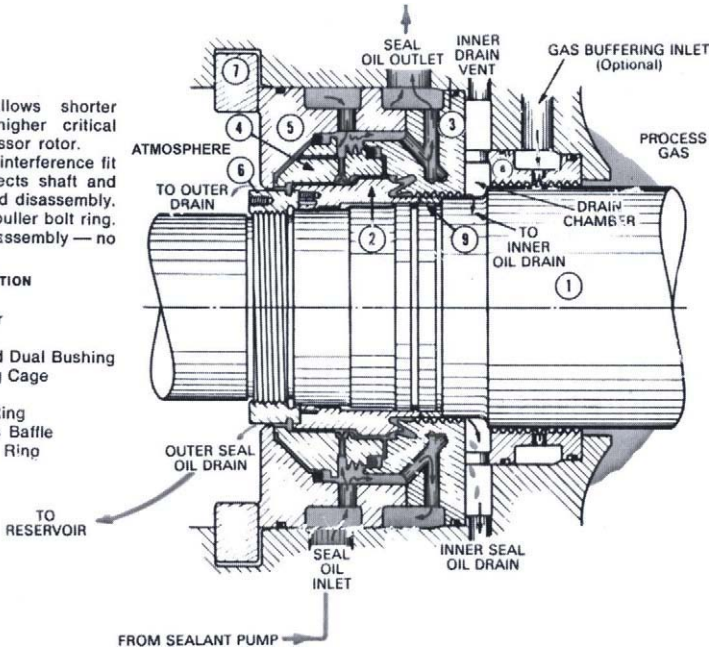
Turbo-compressor 'trapped bushing seal' (Courtesy of A.C. Compressor Corp.)
